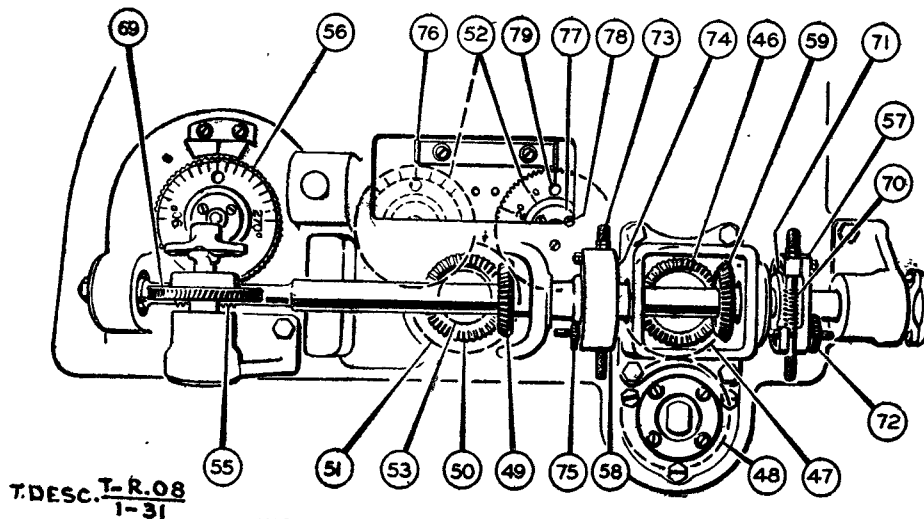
BEARING GEARING AND A.C.C.E.'s.
